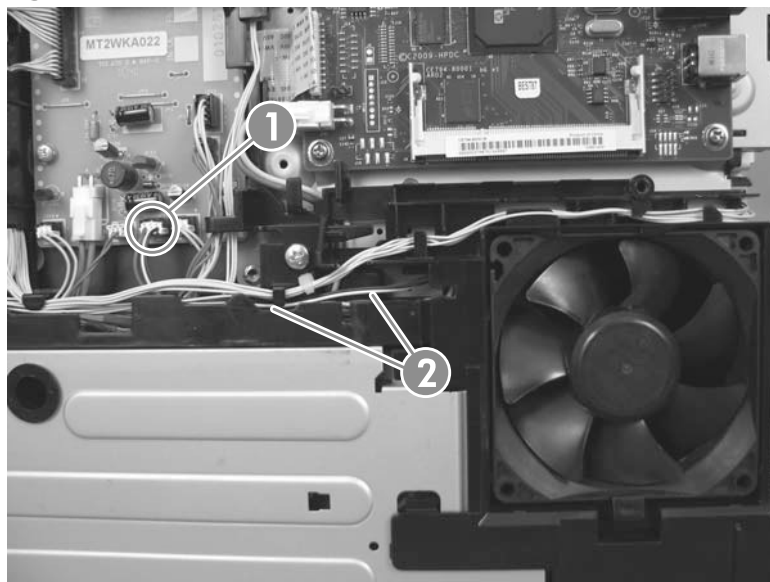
Reinstall the color-misregistration sensor assembly PCA (2 of 2)
